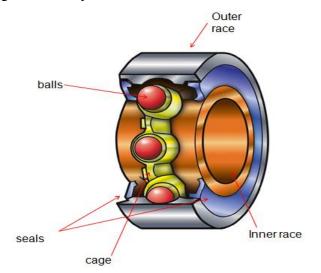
Ball Bearing (Source: Bearing Training Manual, Koyo Corporation USA)
